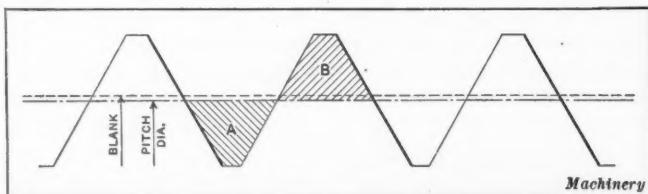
Diagram showing Relation between Diameter of Blank and Pitch Diameter of Rolled Screw Thread
